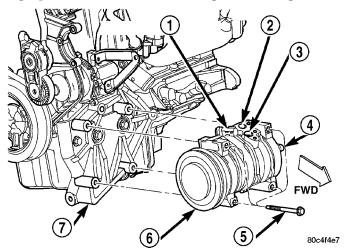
A/C COMPRESSOR REMOVE/INSTALL
